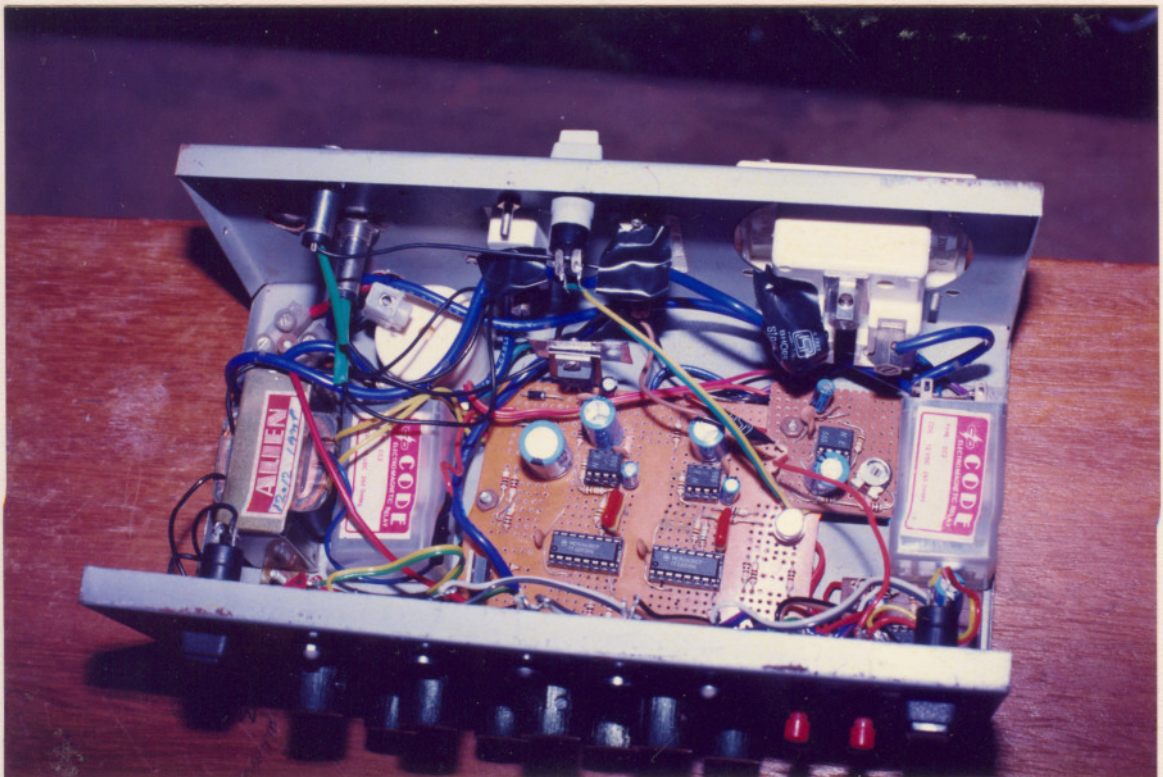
MASTER CONTROL UNIT - INSIDE VIEW
